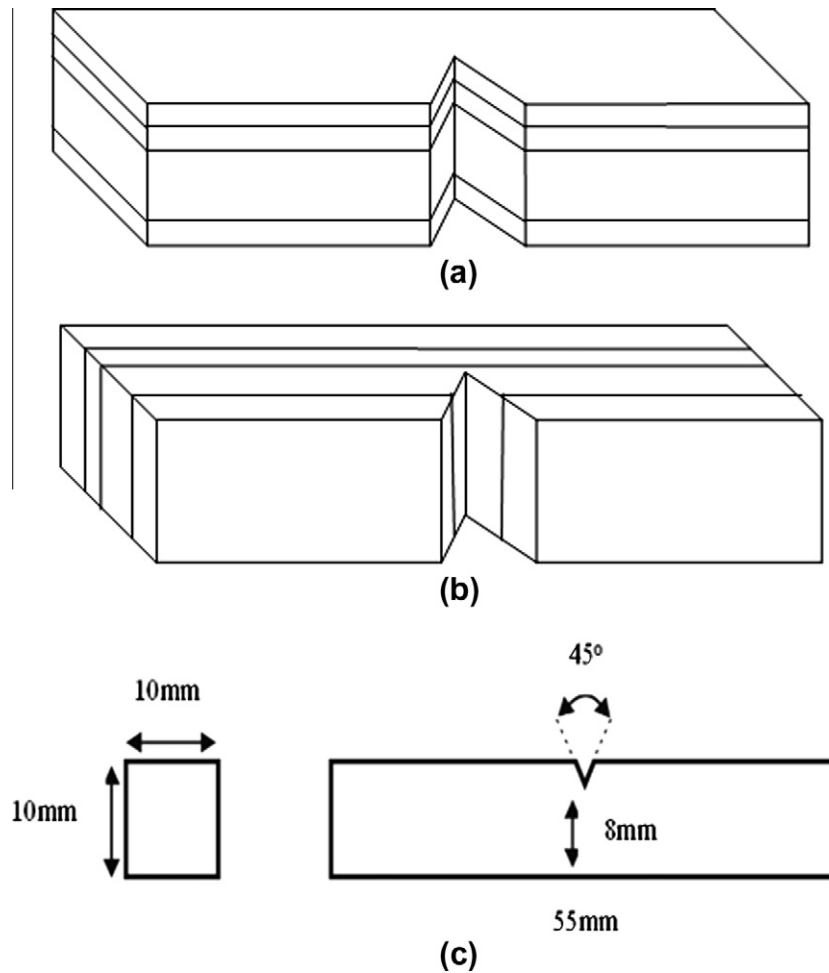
Schematic representation of composite Charpy test specimens in the form of (a) crack divider and (b) crack arrester. (c) Dimension of Charpy impact test specimens.
